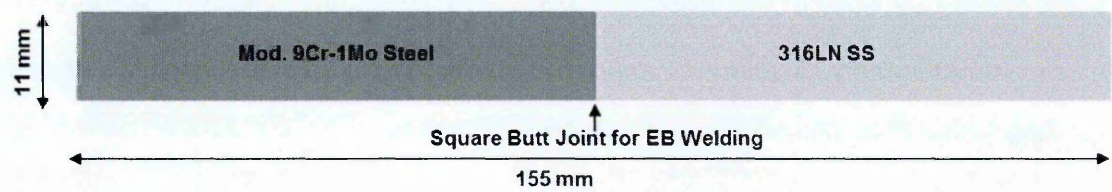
The electron beam weld joint configuration for the P91:316LN plate.
